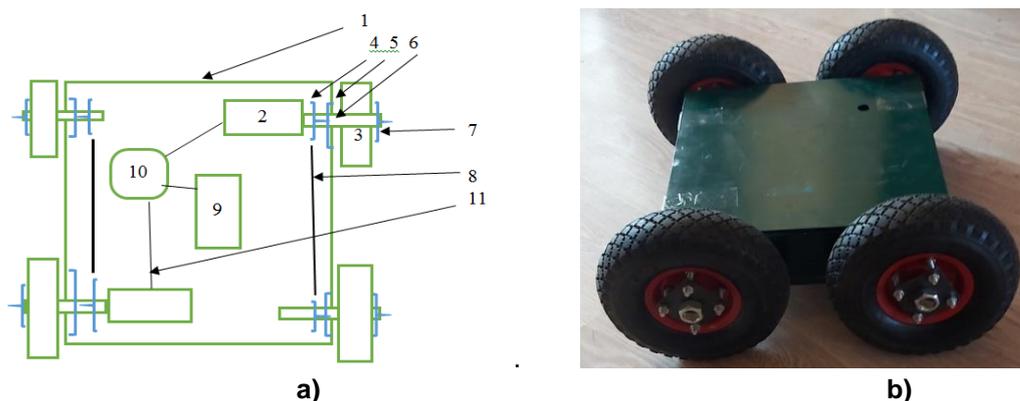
Alytus College remotely controlled mobile robot construct: a – construct (1. Robot body; 2. Engine; 3. wheel; 4. Asterisk; 5. Bearing; 6. Axis; 7. The adapter is designed to connect the wheel with the axis; 8. Chain; 9. Battery; 10. Control unit; 11. Cord).; b – construction (2020)
